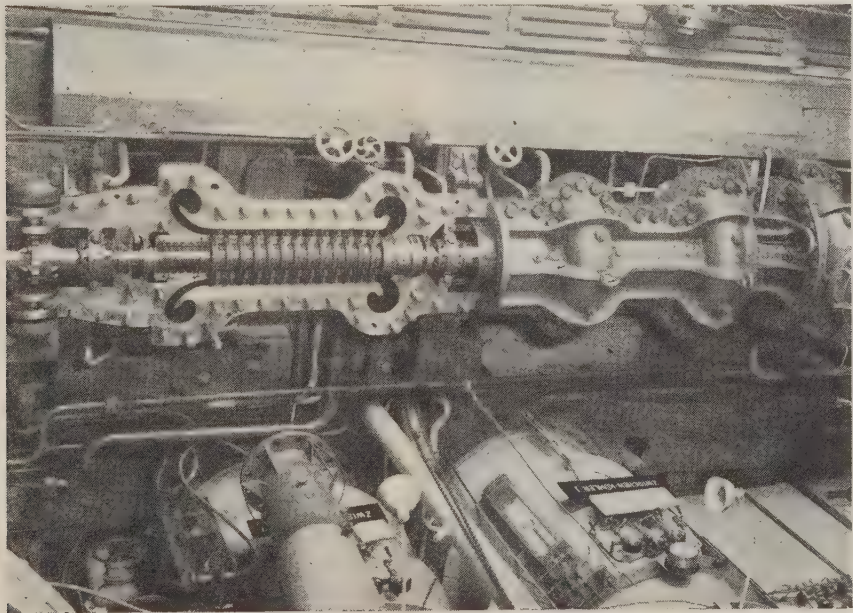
VIEW OF AXIAL-FLOW COMPRESSOR WITH STREAMLINED INLET AND OUTLET CASING (AK-Test Plant.)
